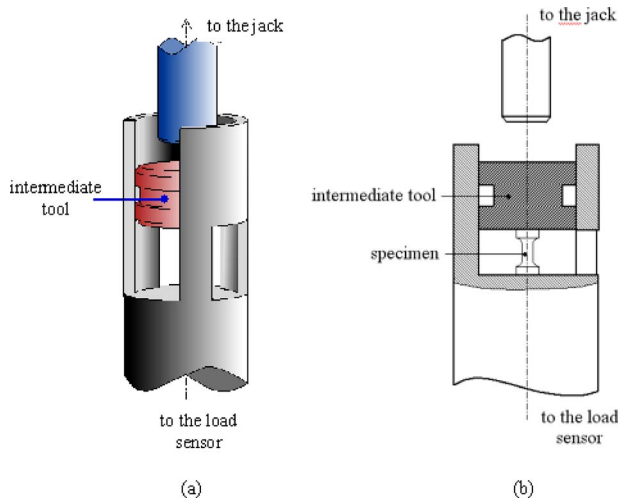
Experimental compression device: (a) 3D view without specimen, and (b) view cut with specimen
